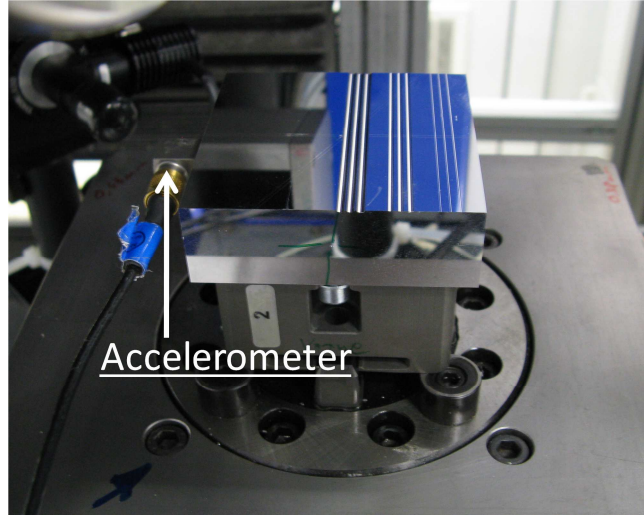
Machining configuration. The accelerometer is glued on the side of the workpiece
